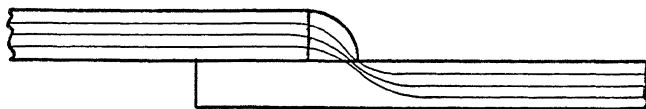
Example of lap weld having poor distribution of stress through weld.
